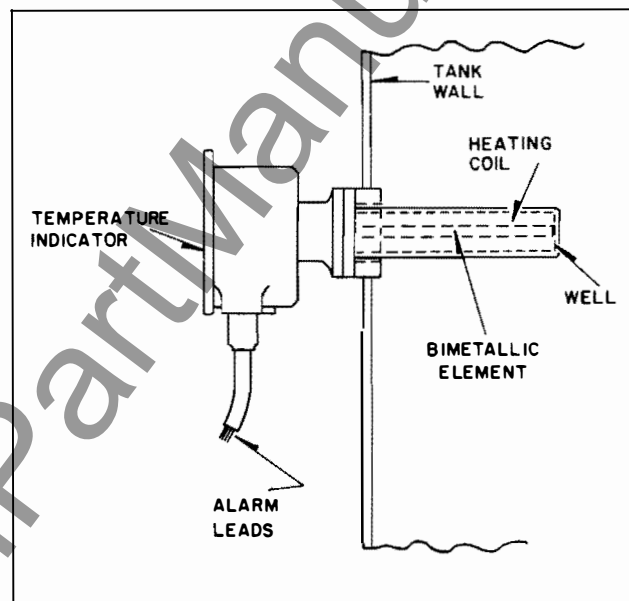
Section View of Transformer Showing Mounting of Indicator
